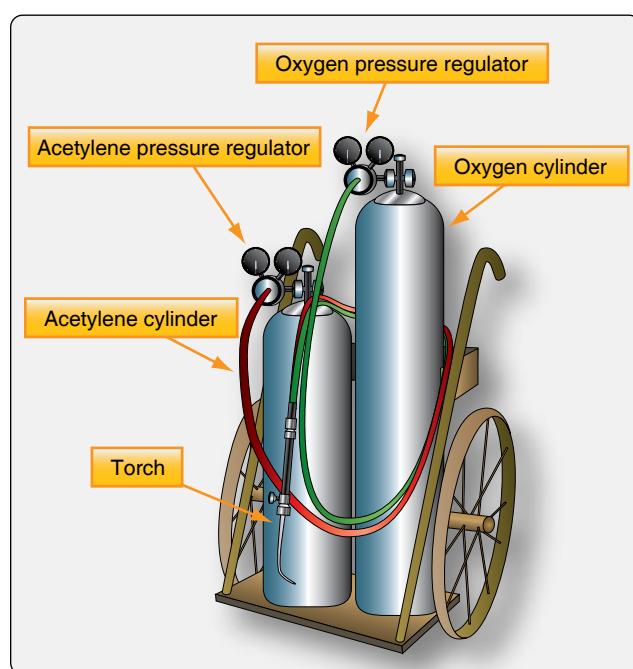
Portable oxy-acetylene welding outfit.
